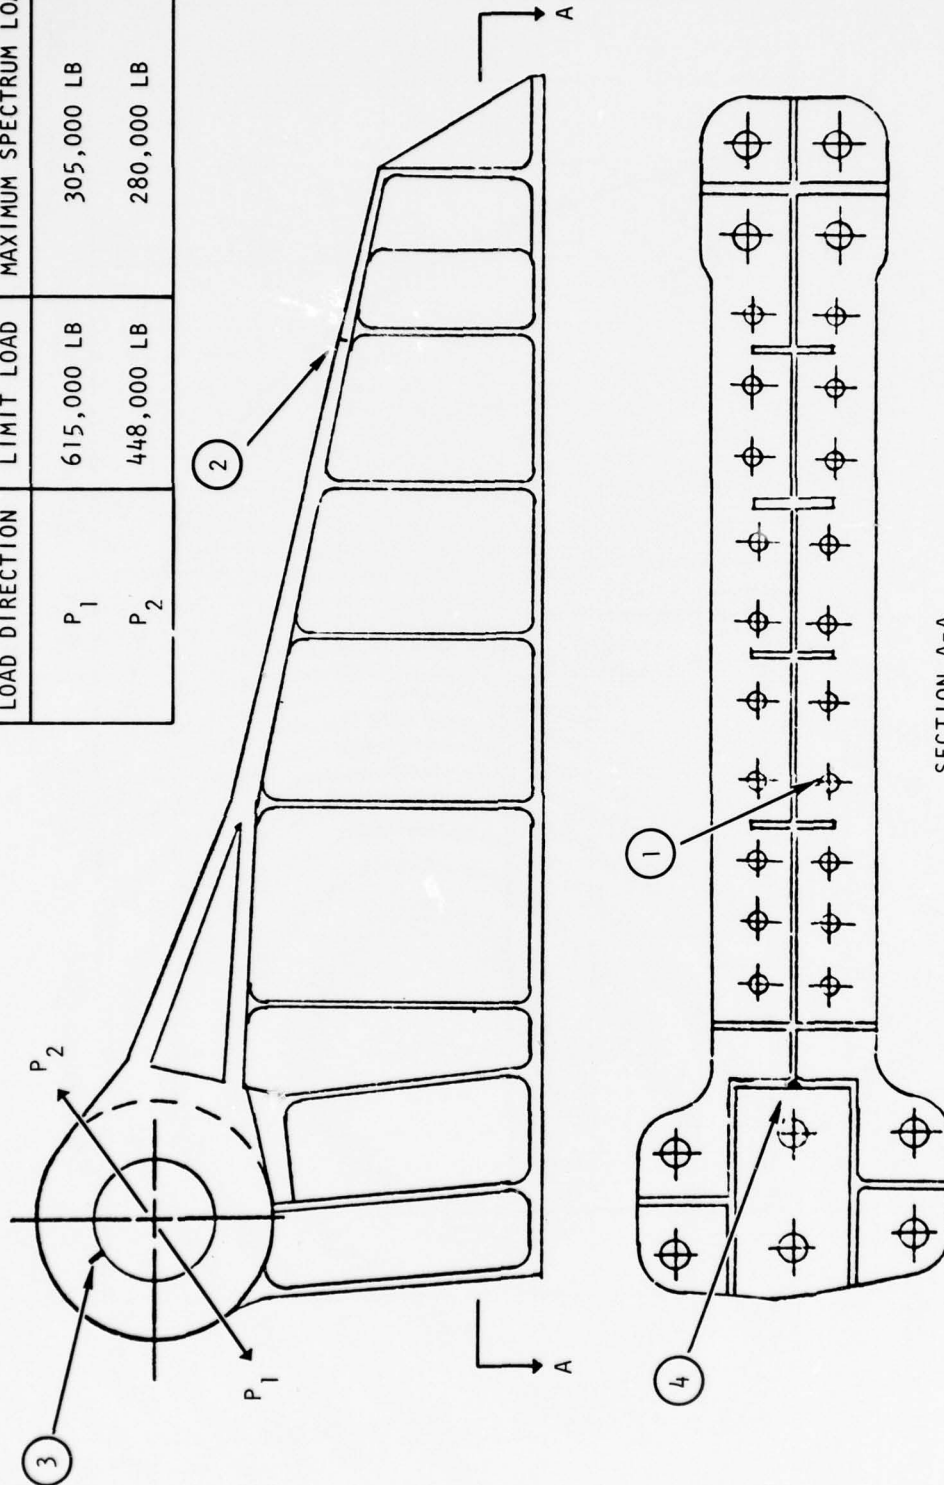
Areas of fatigue and damage tolerance analysis - wing sweep actuator attach fitting.
